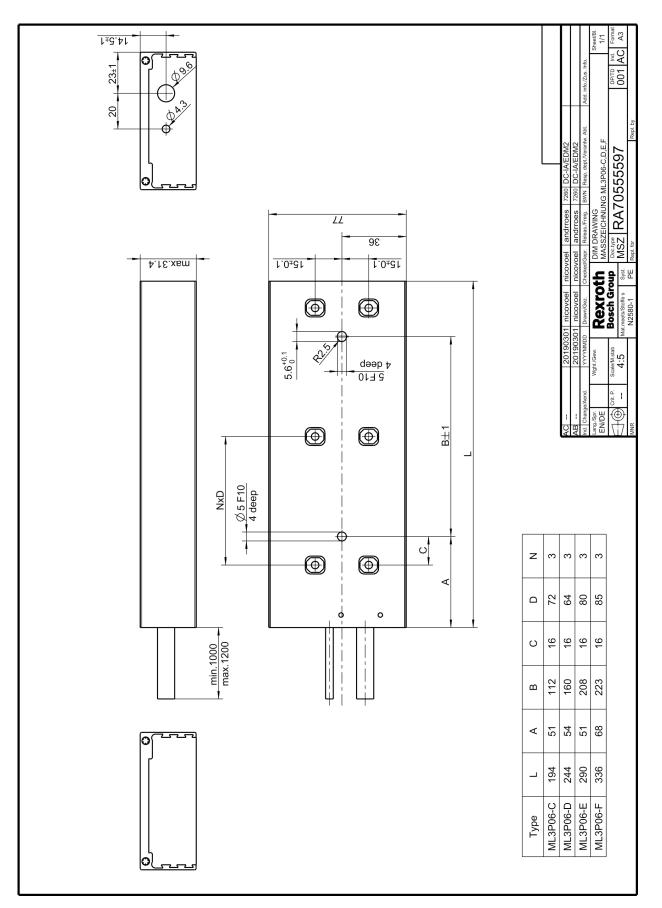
Dimension sheet primary part ML3P06-C/D/E/F
